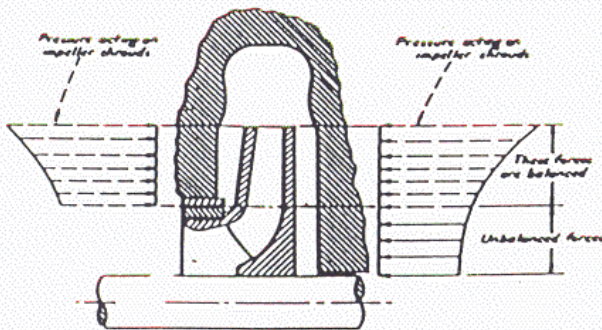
Actual pressure distribution on front and back shrouds of single-suction impeller with shaft through impeller eye
